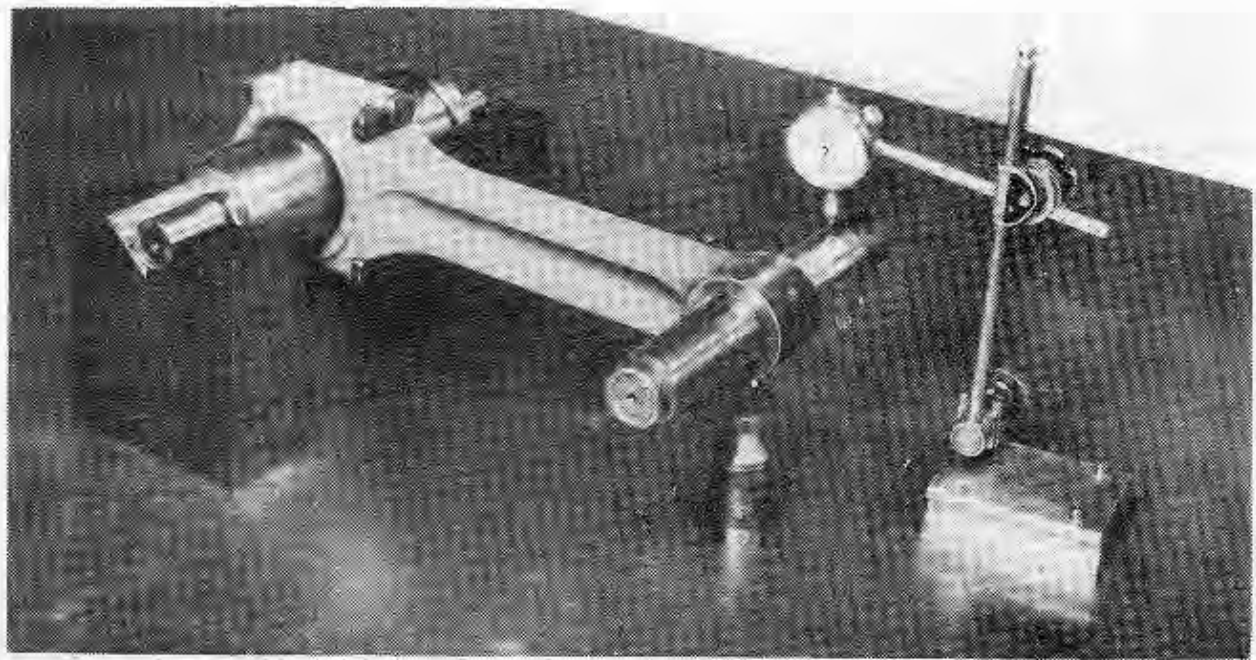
Checking connecting-rod for parallelism and twist on V-blocks
